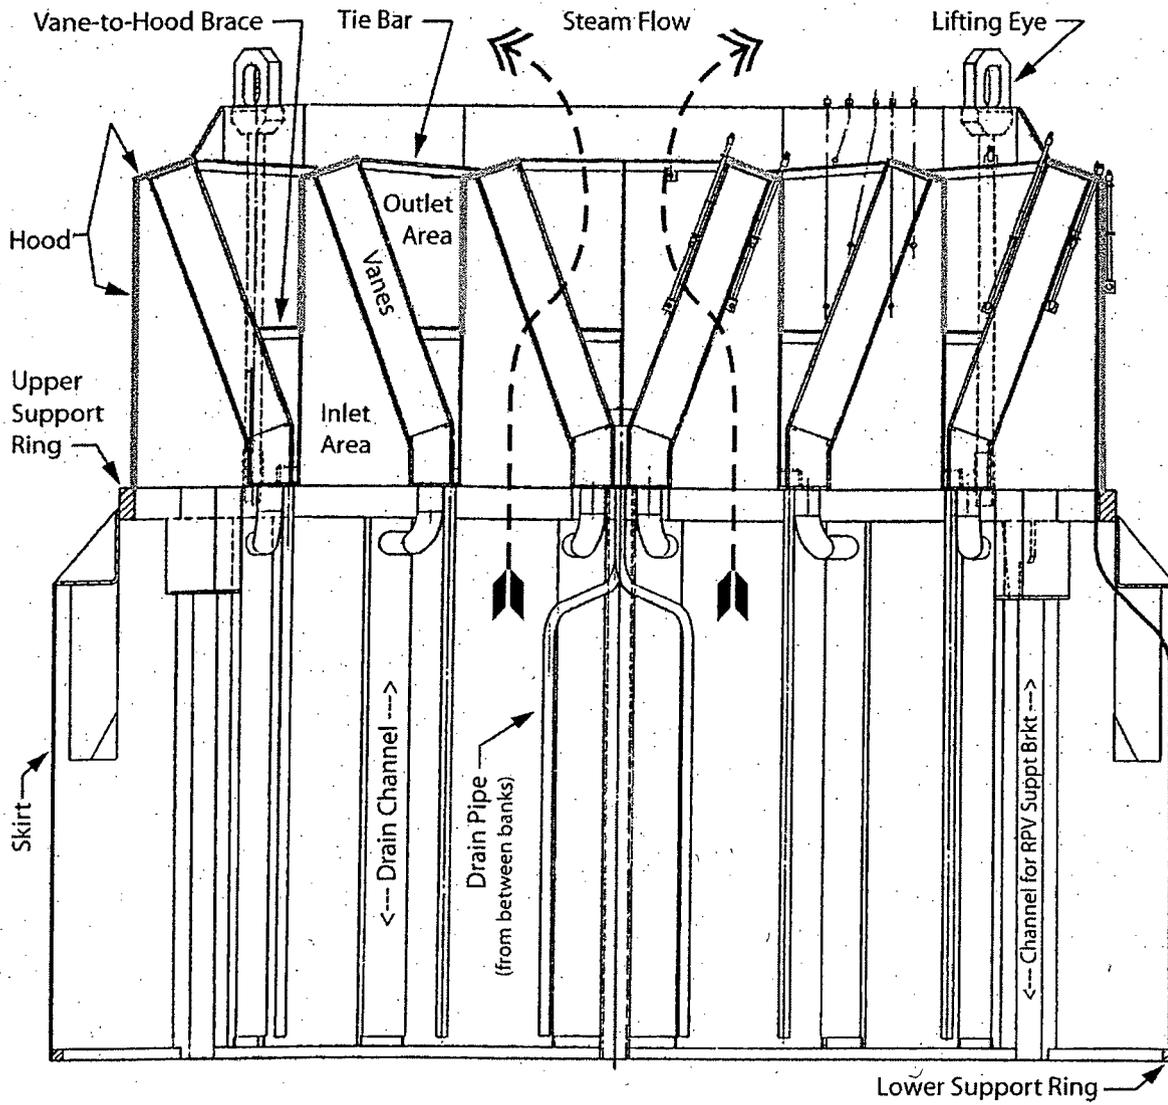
Cross-Section of BWR/2 Steam Dryer
